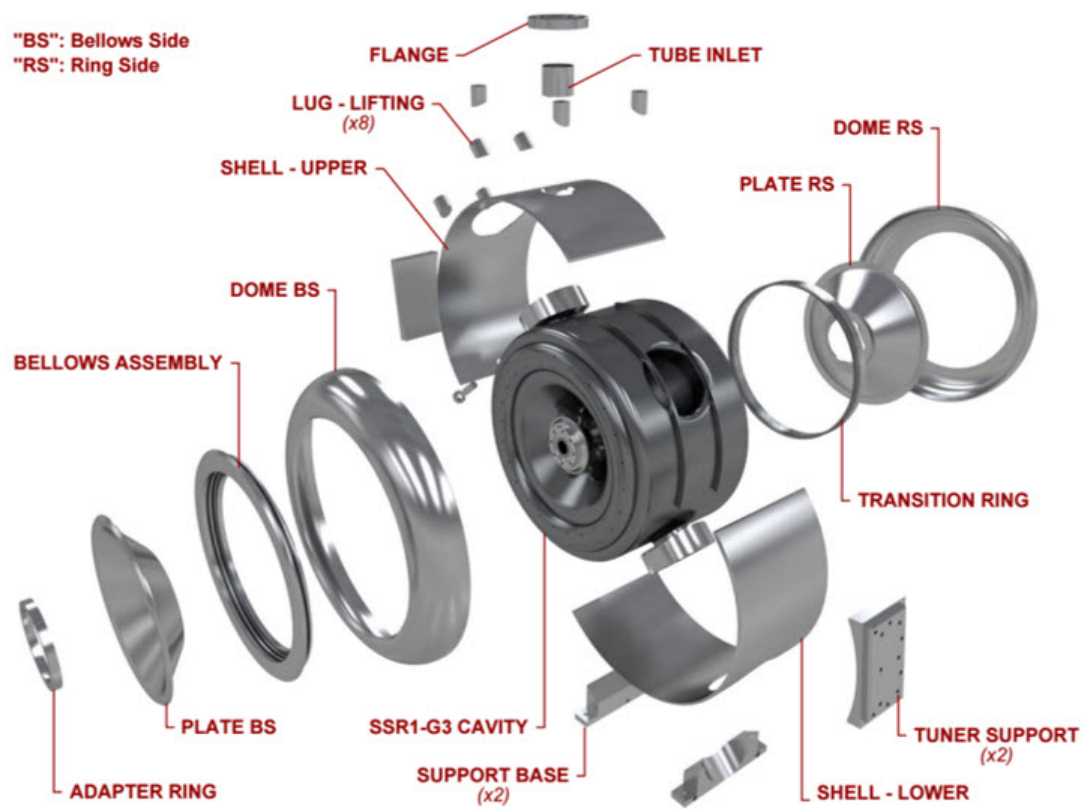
Exploded view of the stainless helium vessel surrounding the SSR1 cavity.
